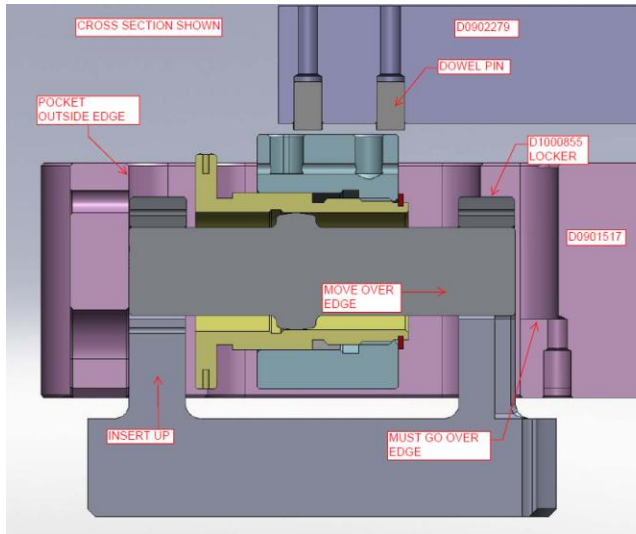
Cross Section of D1000855 Stage 1-2 Locker Assembly Installation 1/2
